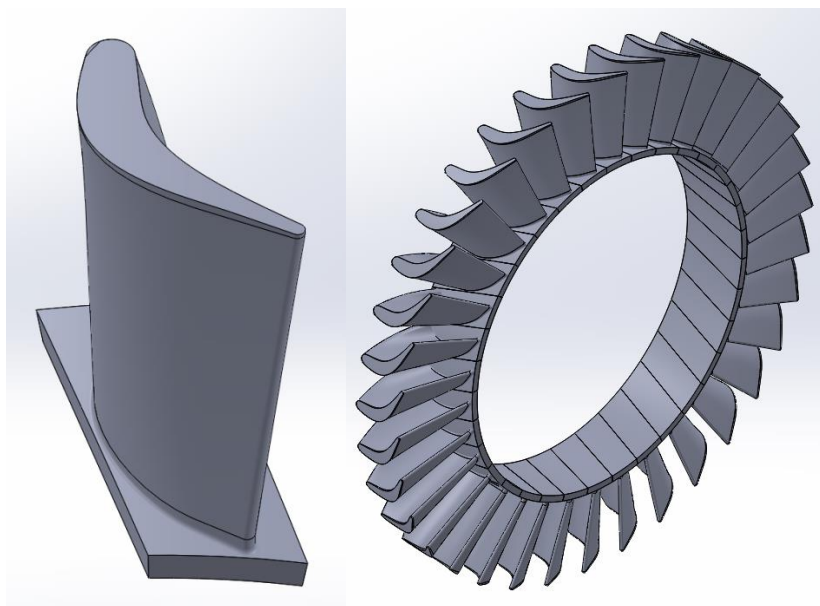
Turbo-expander rotor individual segment and rotating ring assembly
